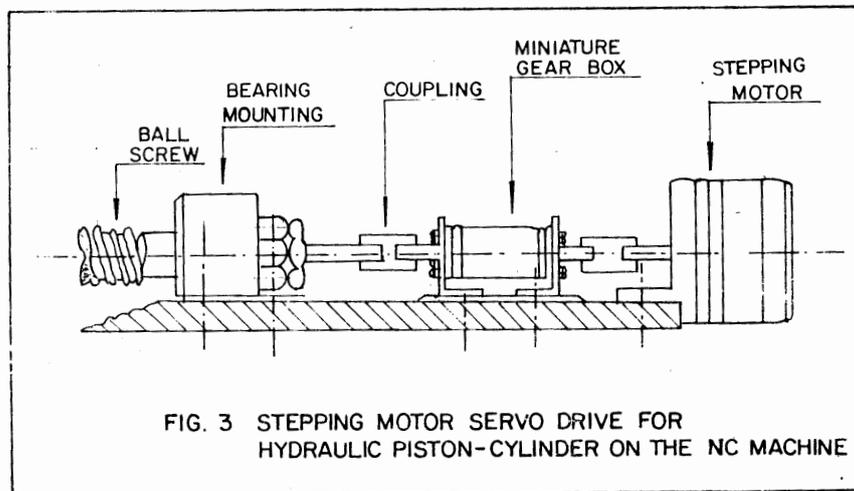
STEPPING MOTOR SERVO DRIVE FOR HYDRAULIC PISTON-CYLINDER ON THE NC MACHINE
